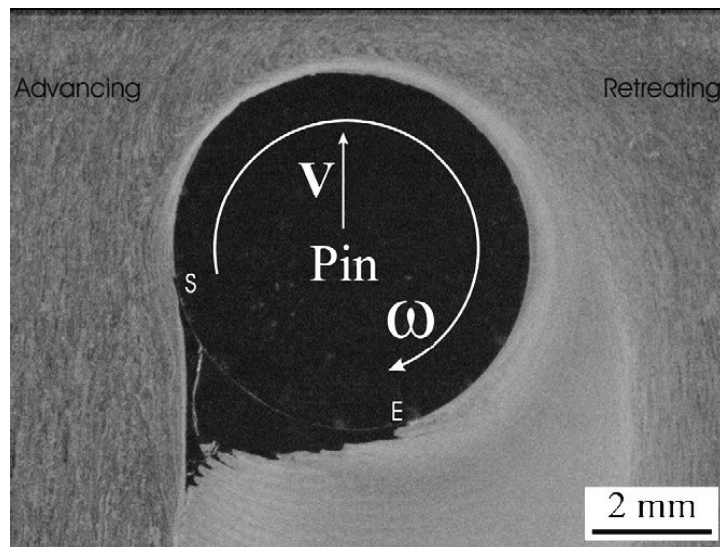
Composite picture (X-Y plane view) of marker materials distribution after welding, taken at 4mm from the top of the weld, indicating the interface between advancing and retreating side, showing the extruded markers with semi-cylindrical shape, where the dashed circle indicates footprint of threaded pin diameter [52]
